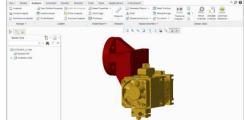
Design of the fixture for attaching the print head to the robot flange.
